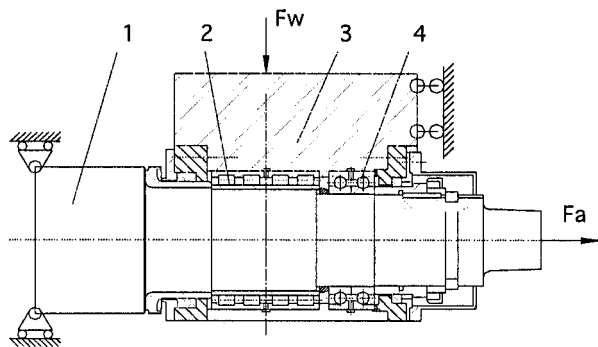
Roller bearings mounted on the work roll. 1. Roll 2. Four row short cylindrical roller bearing 3. Chock 4. Double row angular contact ball bearing.
